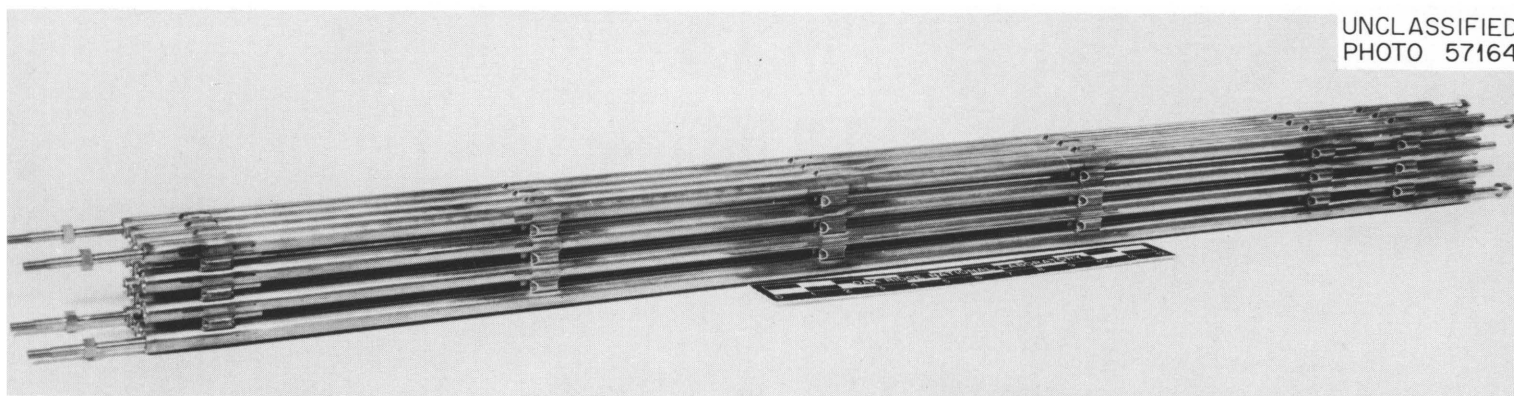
As-Brazed VBWR-MI Irradiation Assembly.
